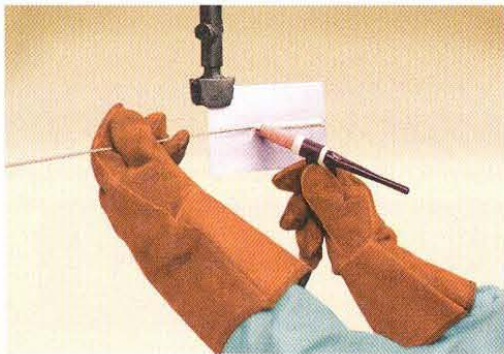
Dip the filler metal into the high side at the front of the weld pool when welding a horizontal butt joint.
